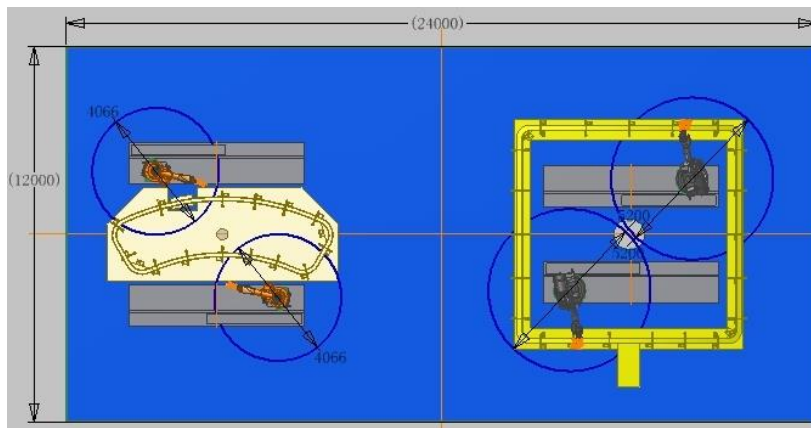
CC overview of laser welding of ITER CC case closure welding
